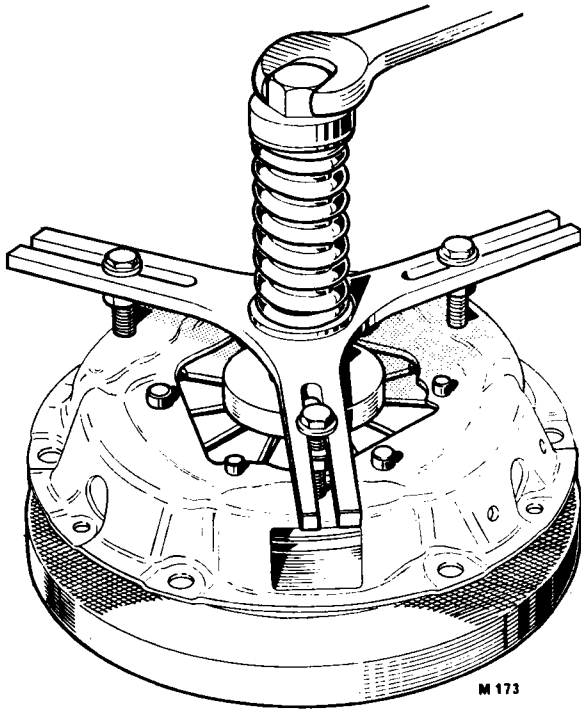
Tighten down the large nut so that the diaphragm spring is compressed flat.
